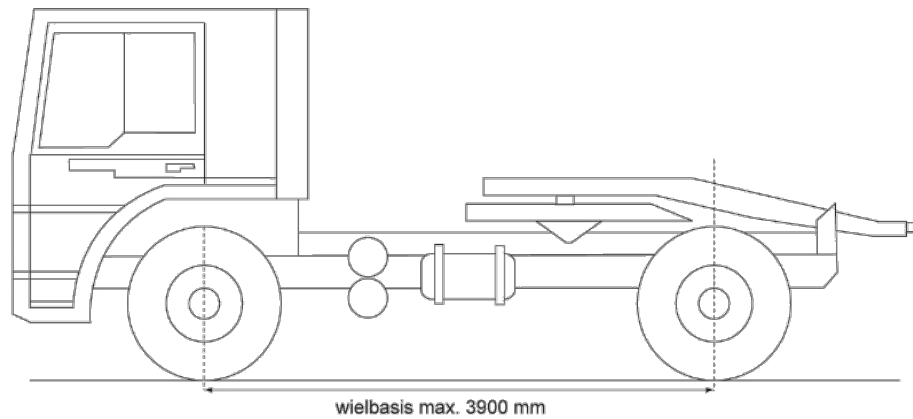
dimensions trucks (4x2); for 6x2: center rear (last) axle
